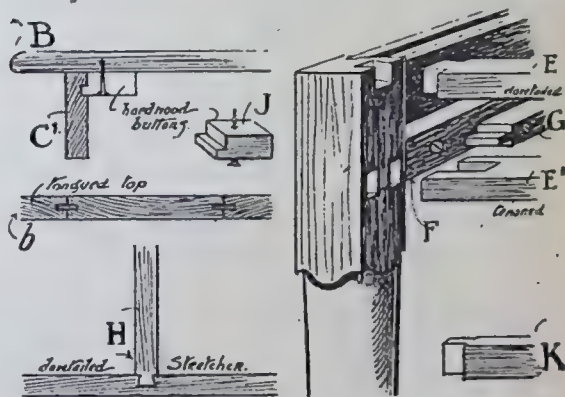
FURTHER DETAILS OF CONSTRUCTION. FIG. 5.—METHOD OF FITTING RAILS FOR DRAWER.
